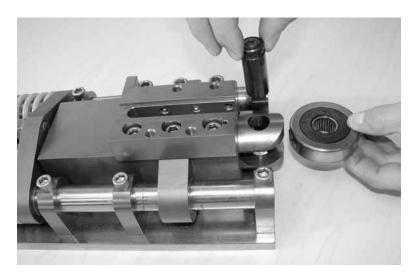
Remove the tracking wheel shaft and the tracking wheel.
